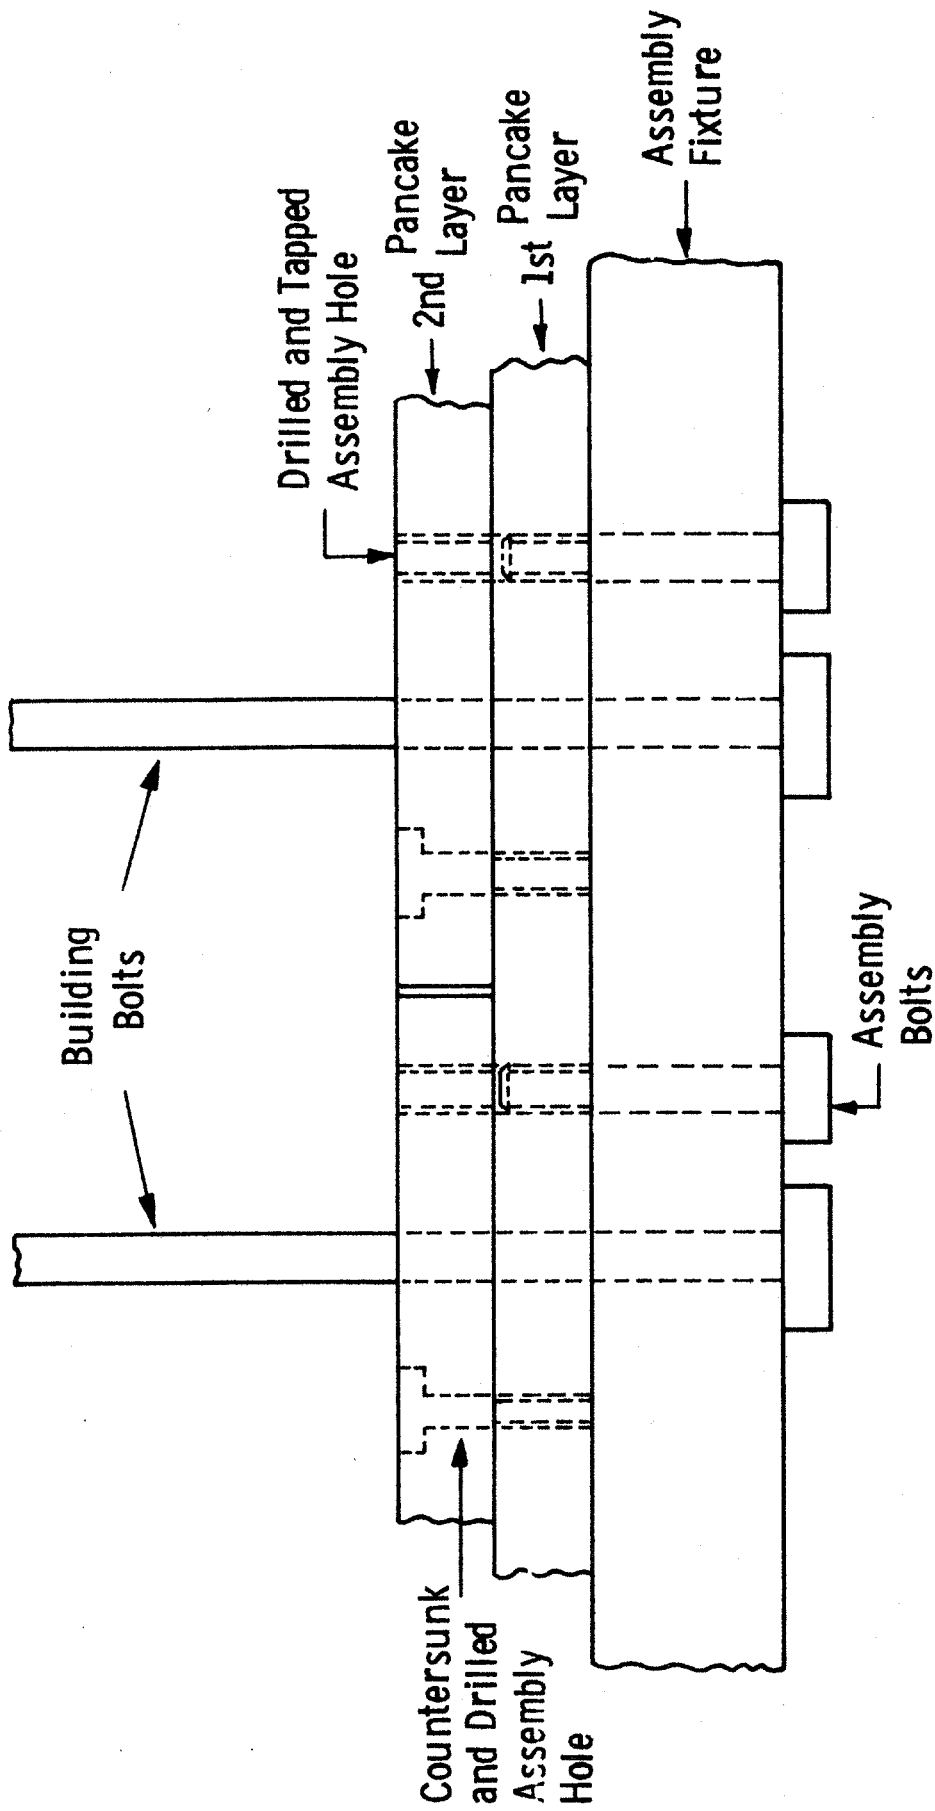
Schematic of Assembly and Building Bolts in Place During Assembly of First and Second Pancake Layers
